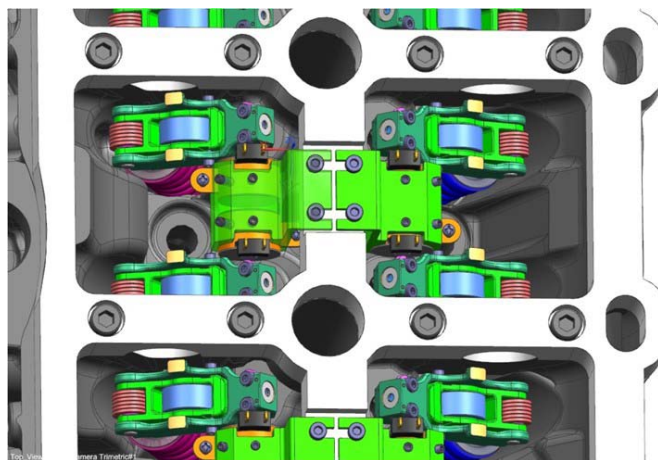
Full valvetrain in-cylinder head packaging
